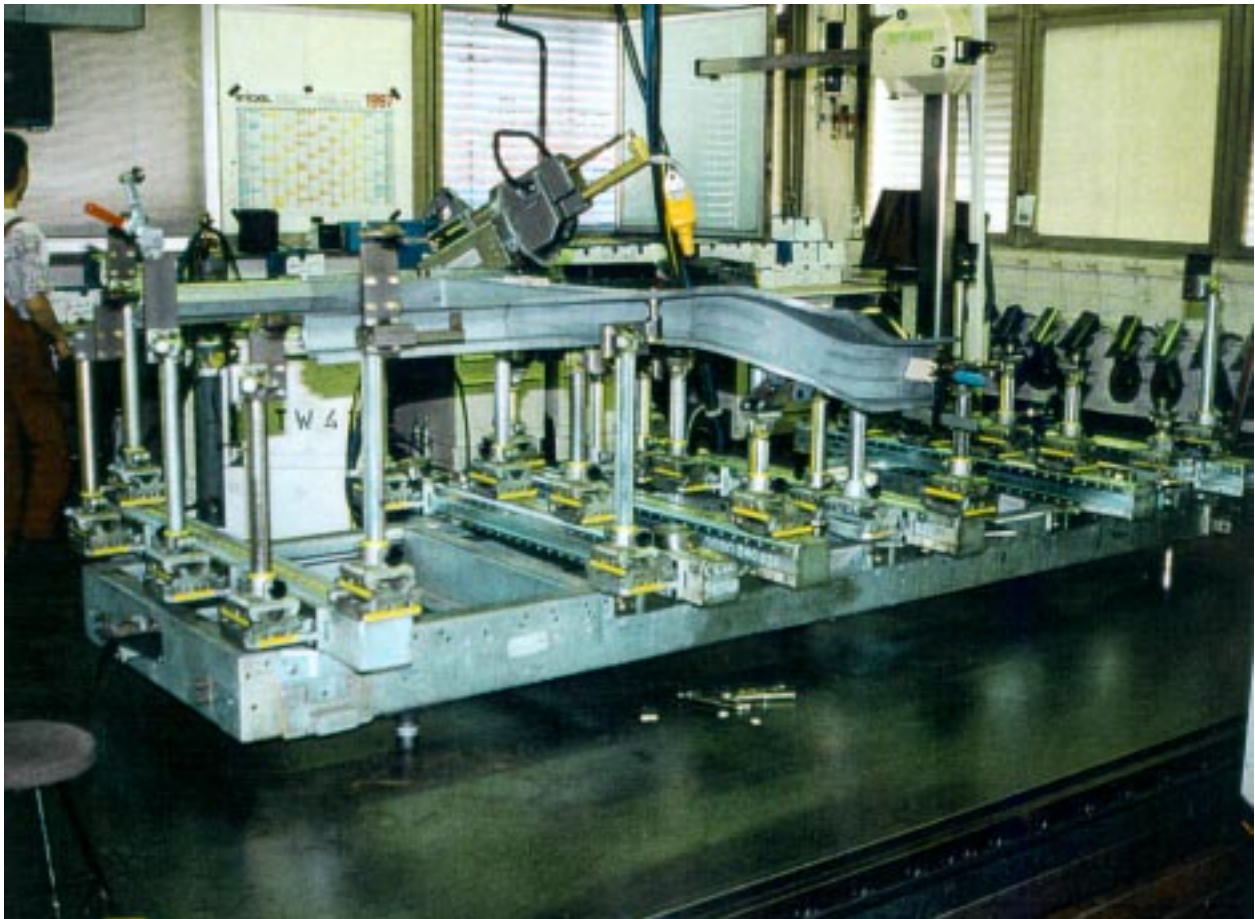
Assembly Fixture Shuttle on Setup Pallet
